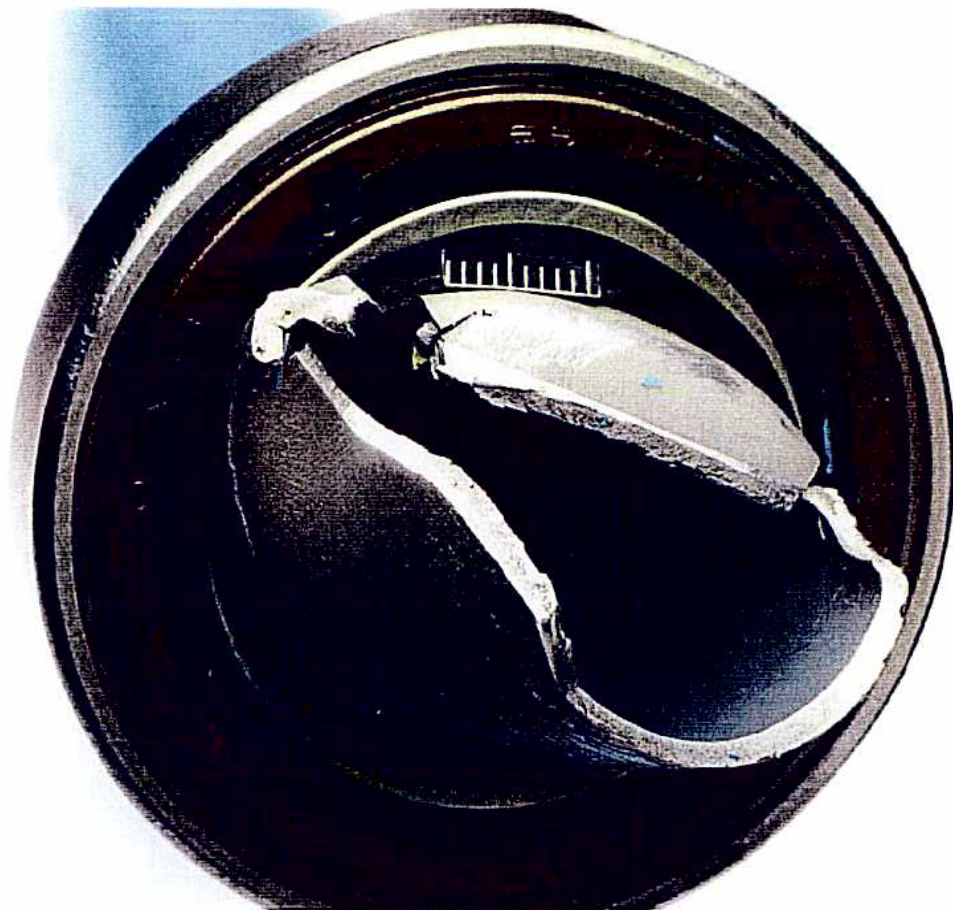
Appearance of the rear fracture in the TR rear drive shaft, seen towards the nearest ball bearing (forward direction). Position of the fracture approx. 68 cm forward to the rear end flange. Material overload as a consequence of bending and shear is indicated on the photo.
